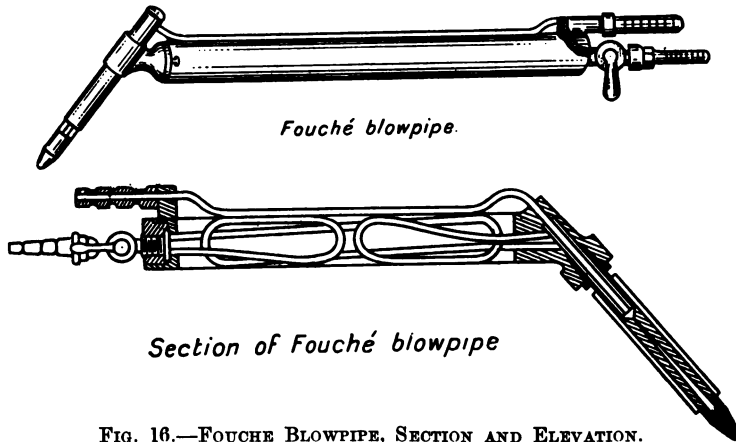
FOUCHE BLOWPIPE, SECTION AND ELEVATION.
